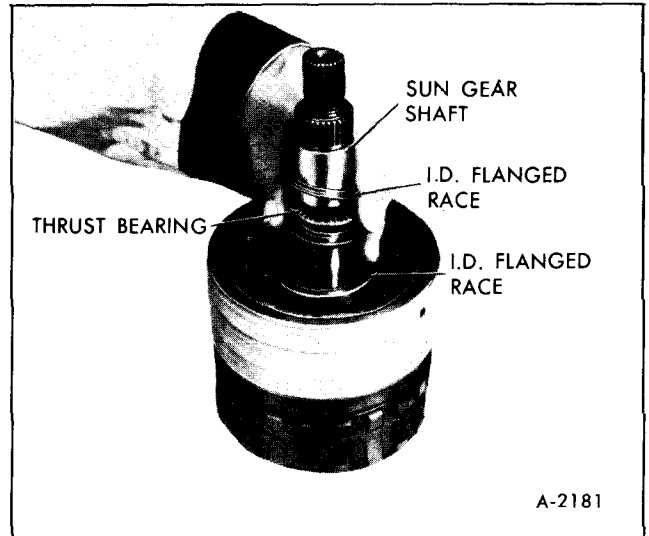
Installing Thrust Bearing over Sun Gear Shaft
